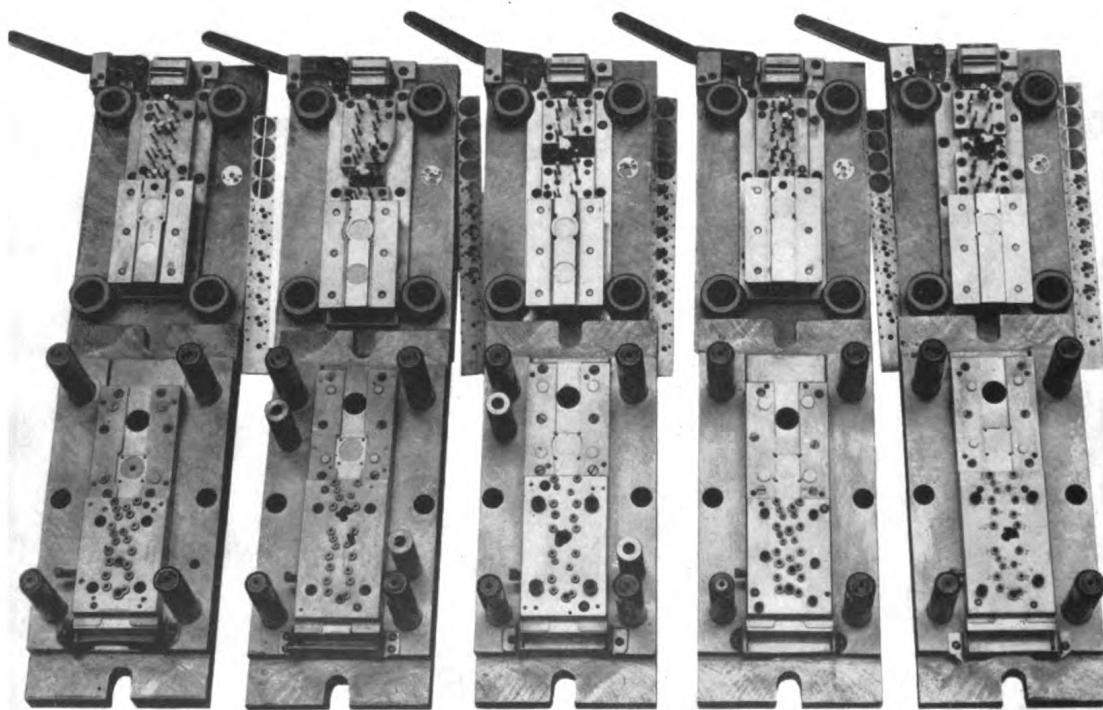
Typical Jig Borer work is represented by these progressive dies which pierce, shave, gut and blank timing device parts. Holes are precisely Jig Bored in punch plate, stripper and die shoe, insuring accuracy of alignment.
